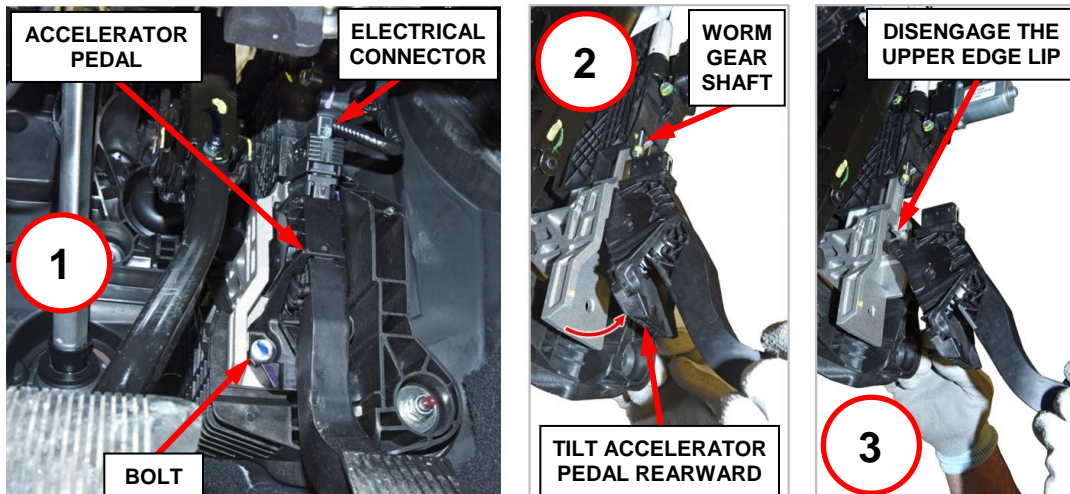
Remove Accelerator Pedal to Expose Worm Gear Shaft
